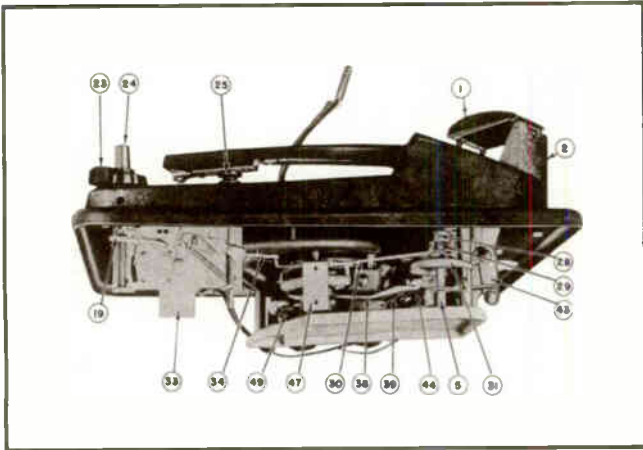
Showing the Parts in a Right Side View of the Model 70. (Courtesy Webster-Chicago)
